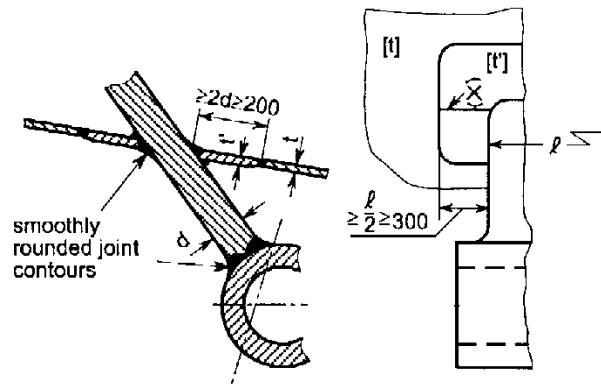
Propeller bracket with integrally cast welding flanges
